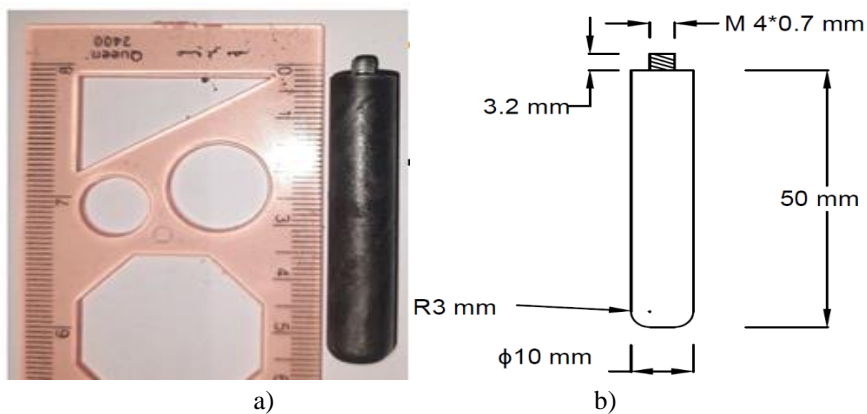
Rotational tool dimensions (a) schematic drawing (b) machined tool.
